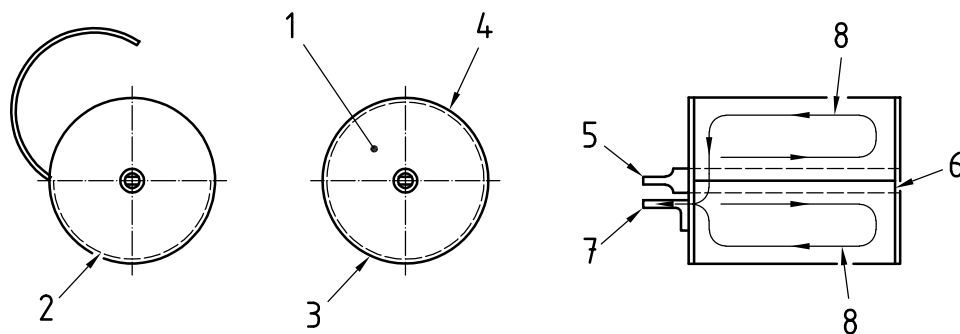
Example using a resistance spot welding machine as the test stage
